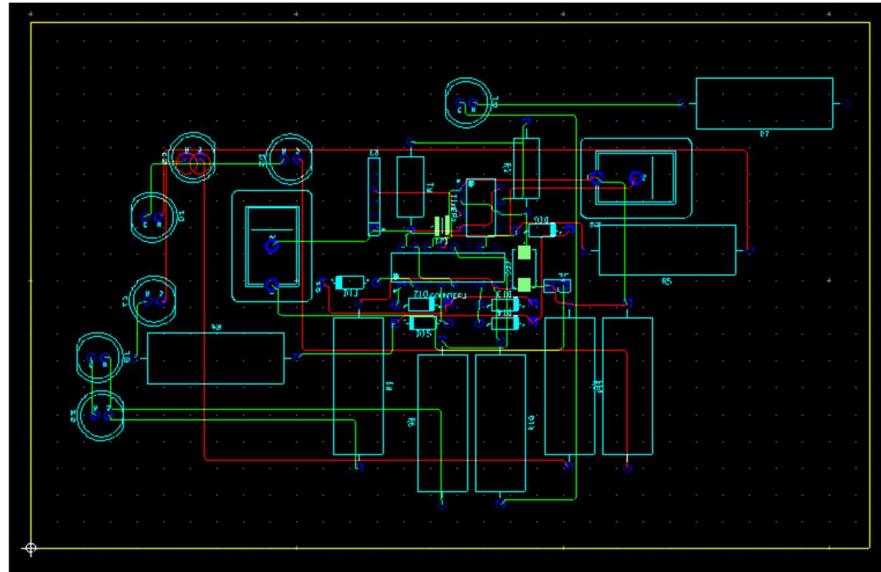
Final 2D PCB layout of the digital dice circuit generated in Ultiboard, showing component placement, copper routing (both layers), and board outline prior to manufacturing export.
